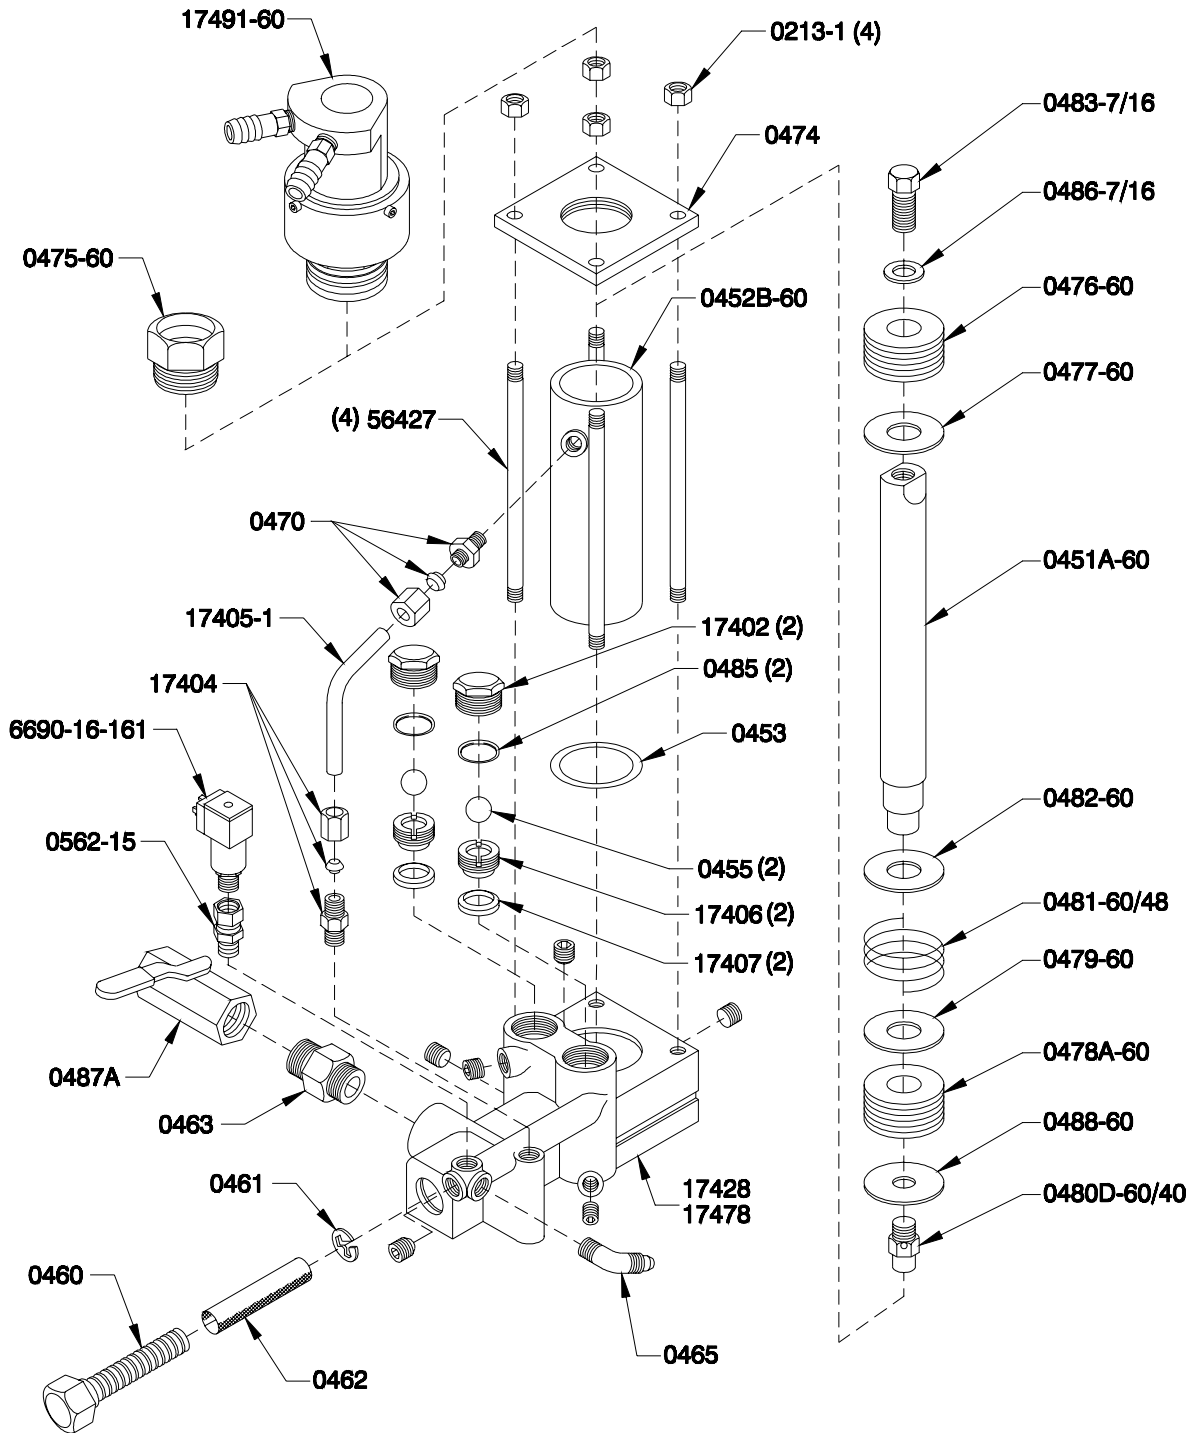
Primary Heater, (Part No. 18300, 23300), Exploded View
